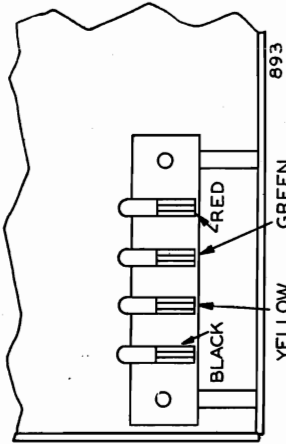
CONNECTOR STRIP ON CHASSIS FOR POWER UNIT
